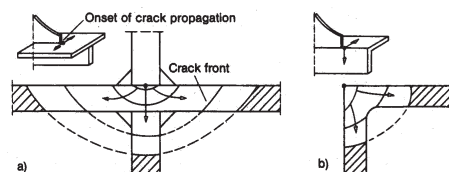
Crack propagation observed in hull girders of ships.¹³⁾
